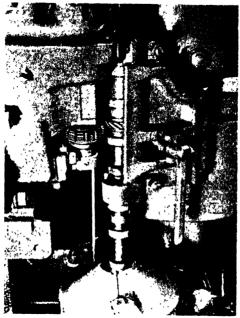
Hobbing on a Lees-Bradner Hobbing Machine. The Job is a Spiral Gear in Centre of Automobile Cambraft
